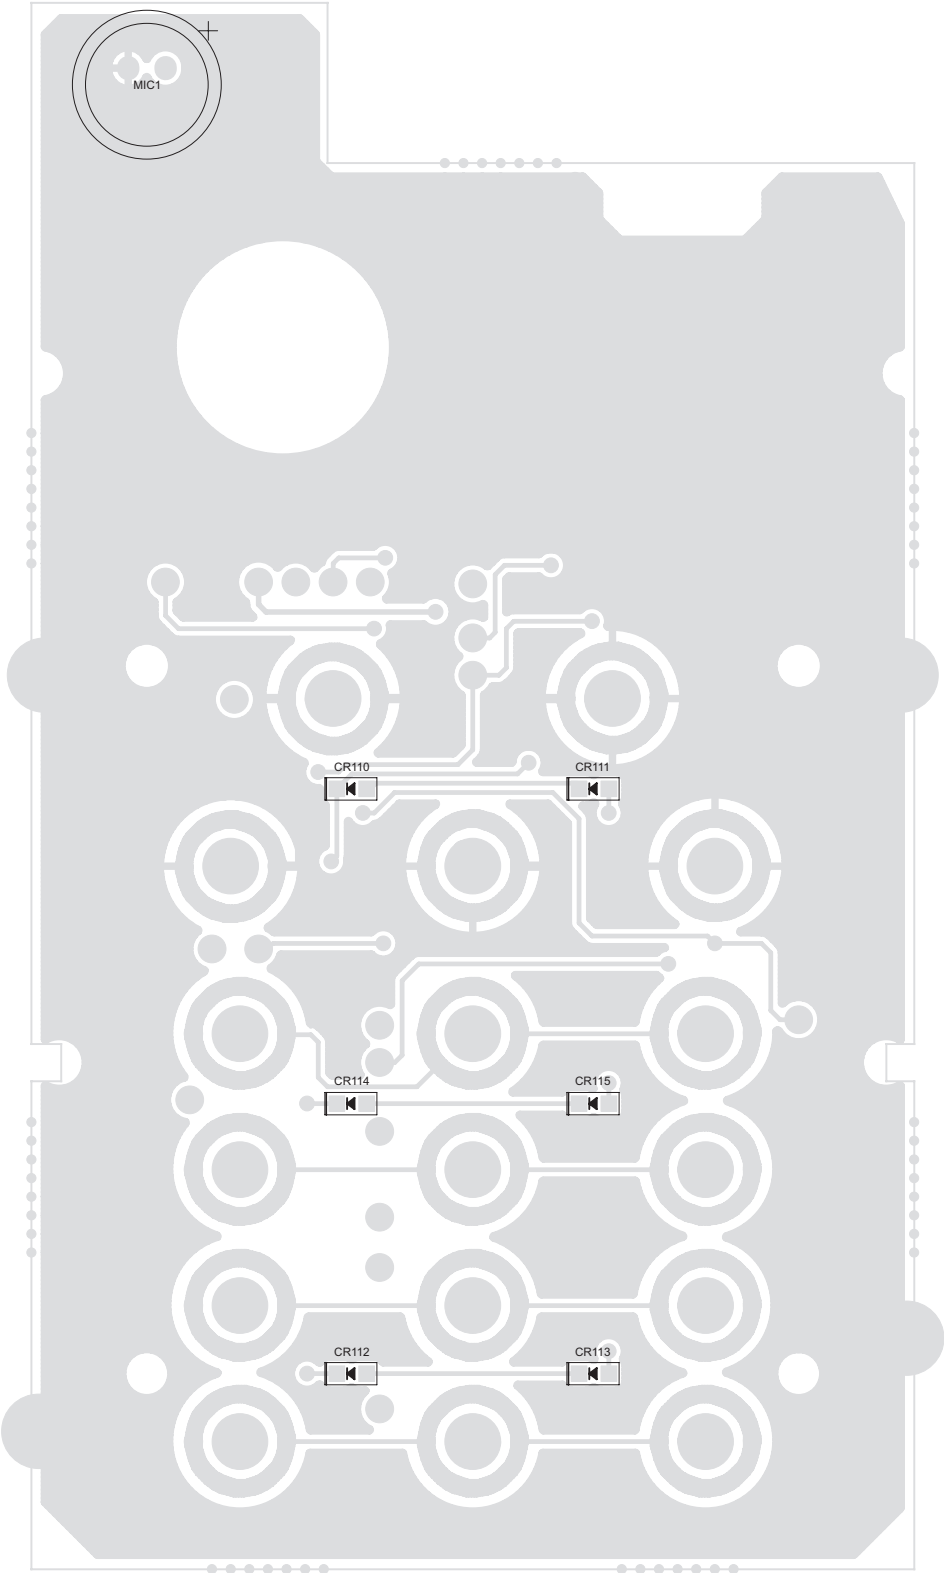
UHF1 (403–447 MHz) Keypad Board: PCB No. E11-000886-00
